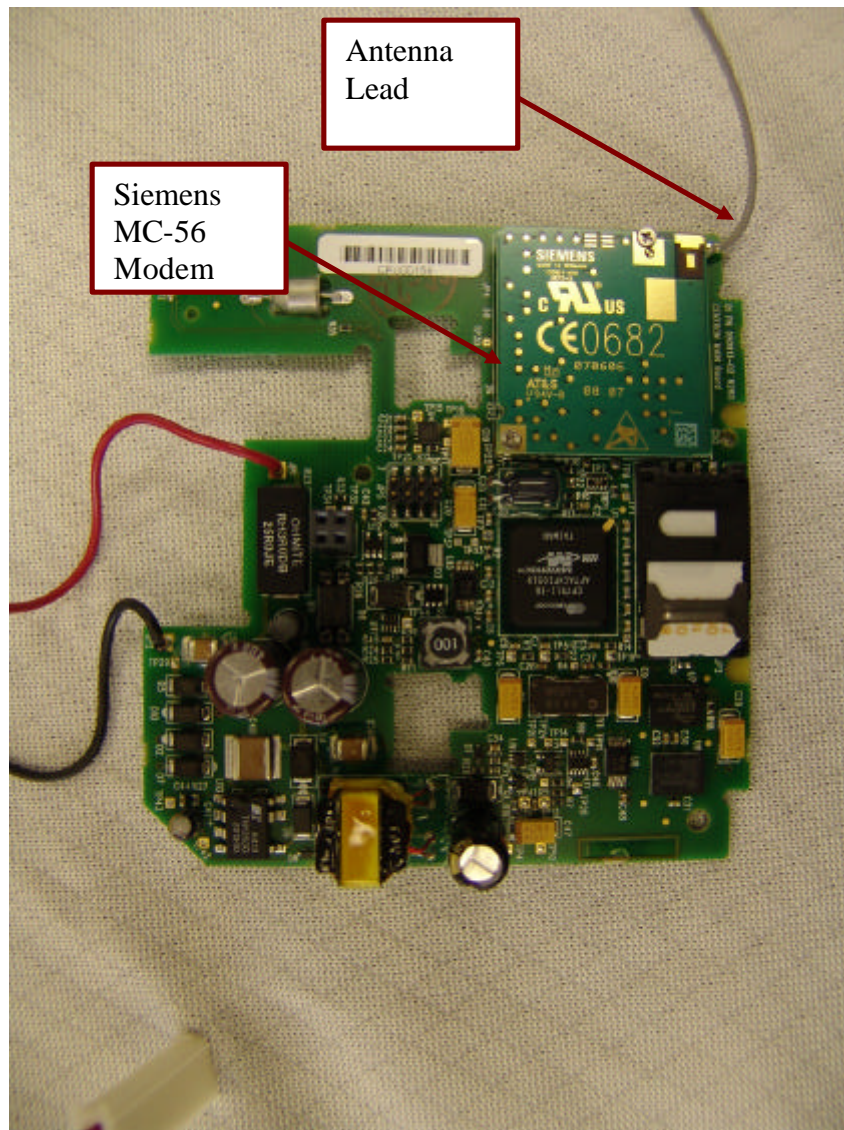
SmartSynch Module Board – Capacitor Bank Board (CBB) Removed, Revealing Siemens MC-56 Modem Underneath
